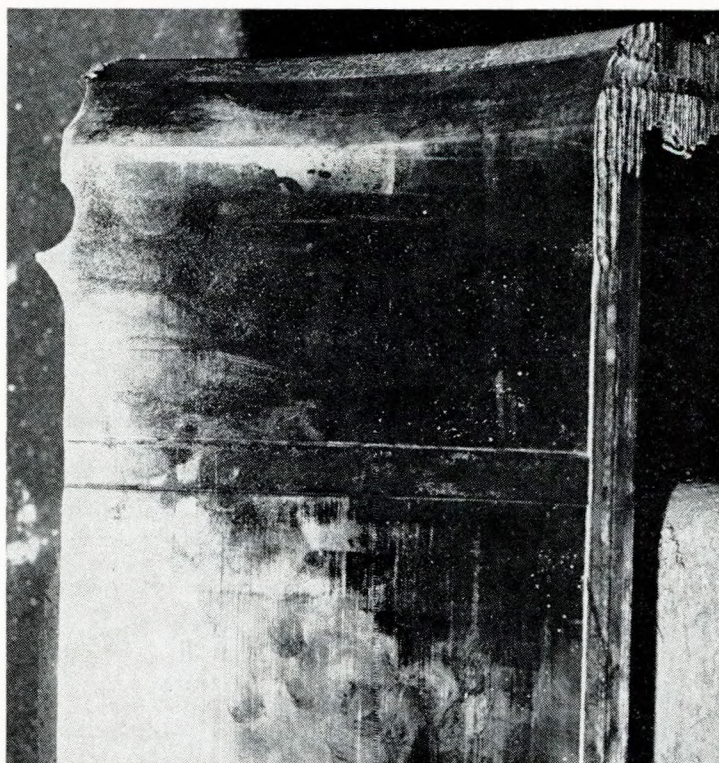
Inside sectional view of an A.O. liner showing circumferential groove region of the top ring
